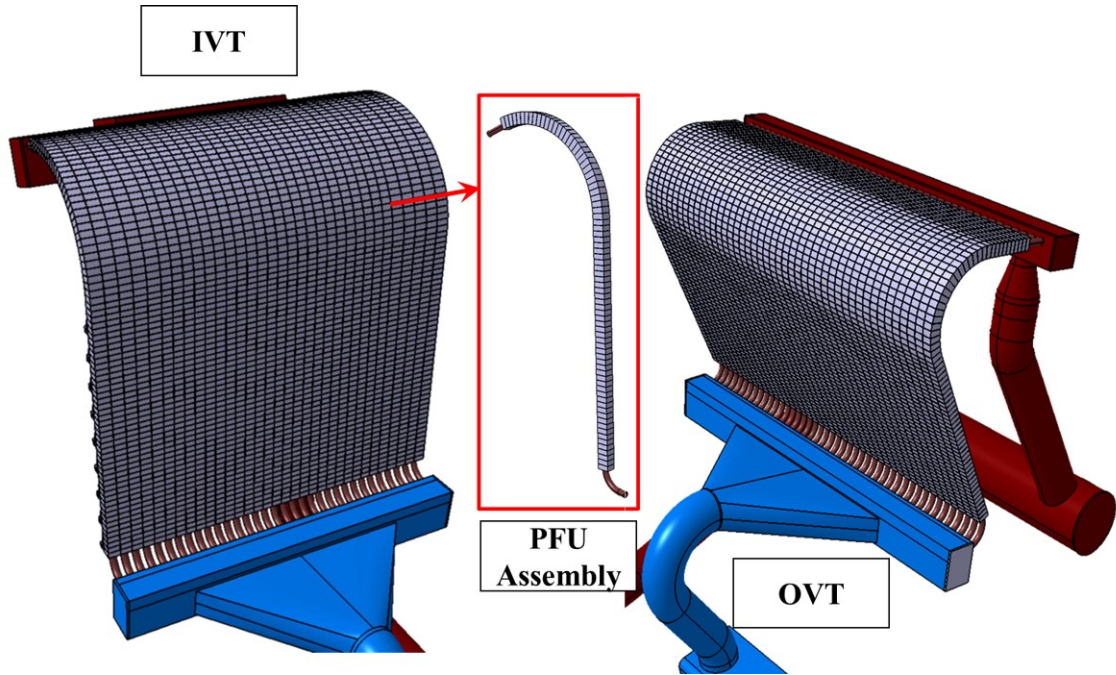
Details of the VTs and of a single PFU assembly [6].
